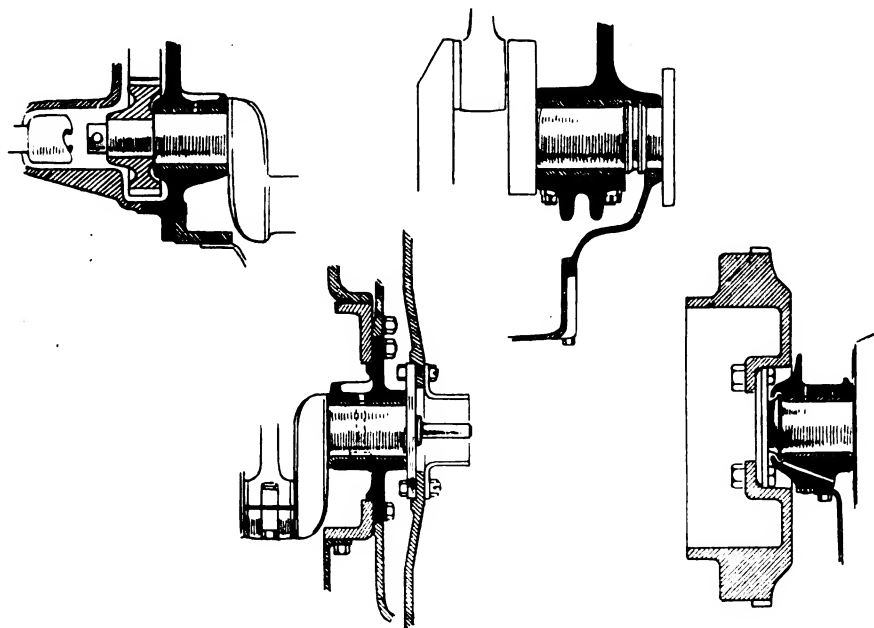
TYPICAL EXAMPLES OF BEARING LAYOUTS
